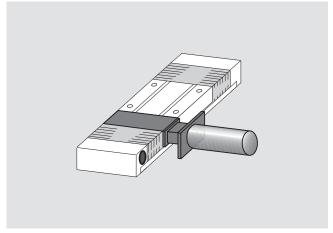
Reversing drive at right hand side (Mounting condition 11 or 13)
